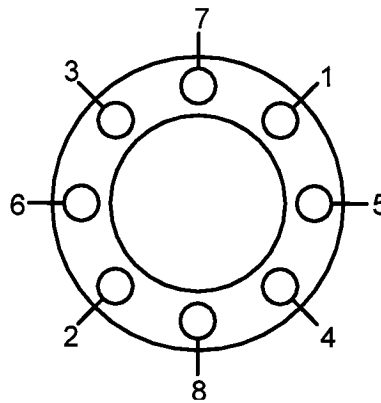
Order of Bolt Tightening for the Mechanically Fastened Pipe Joint
